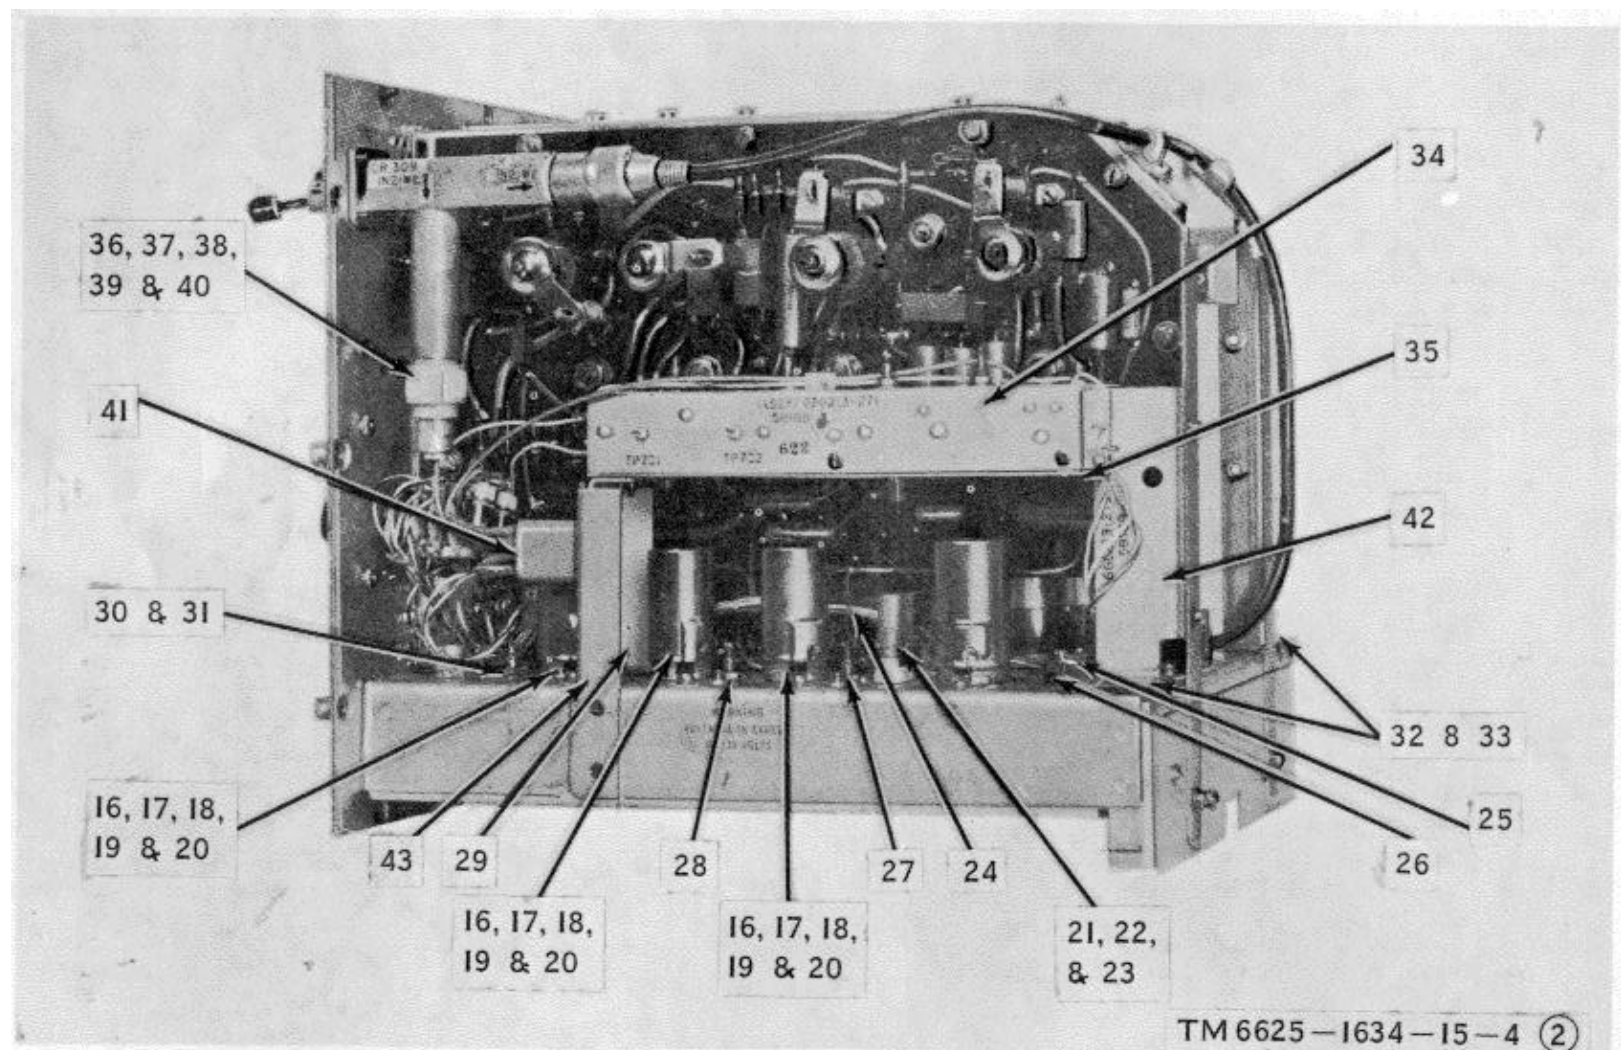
(2). Electrical equipment chassis (sheet 2 of 4).
